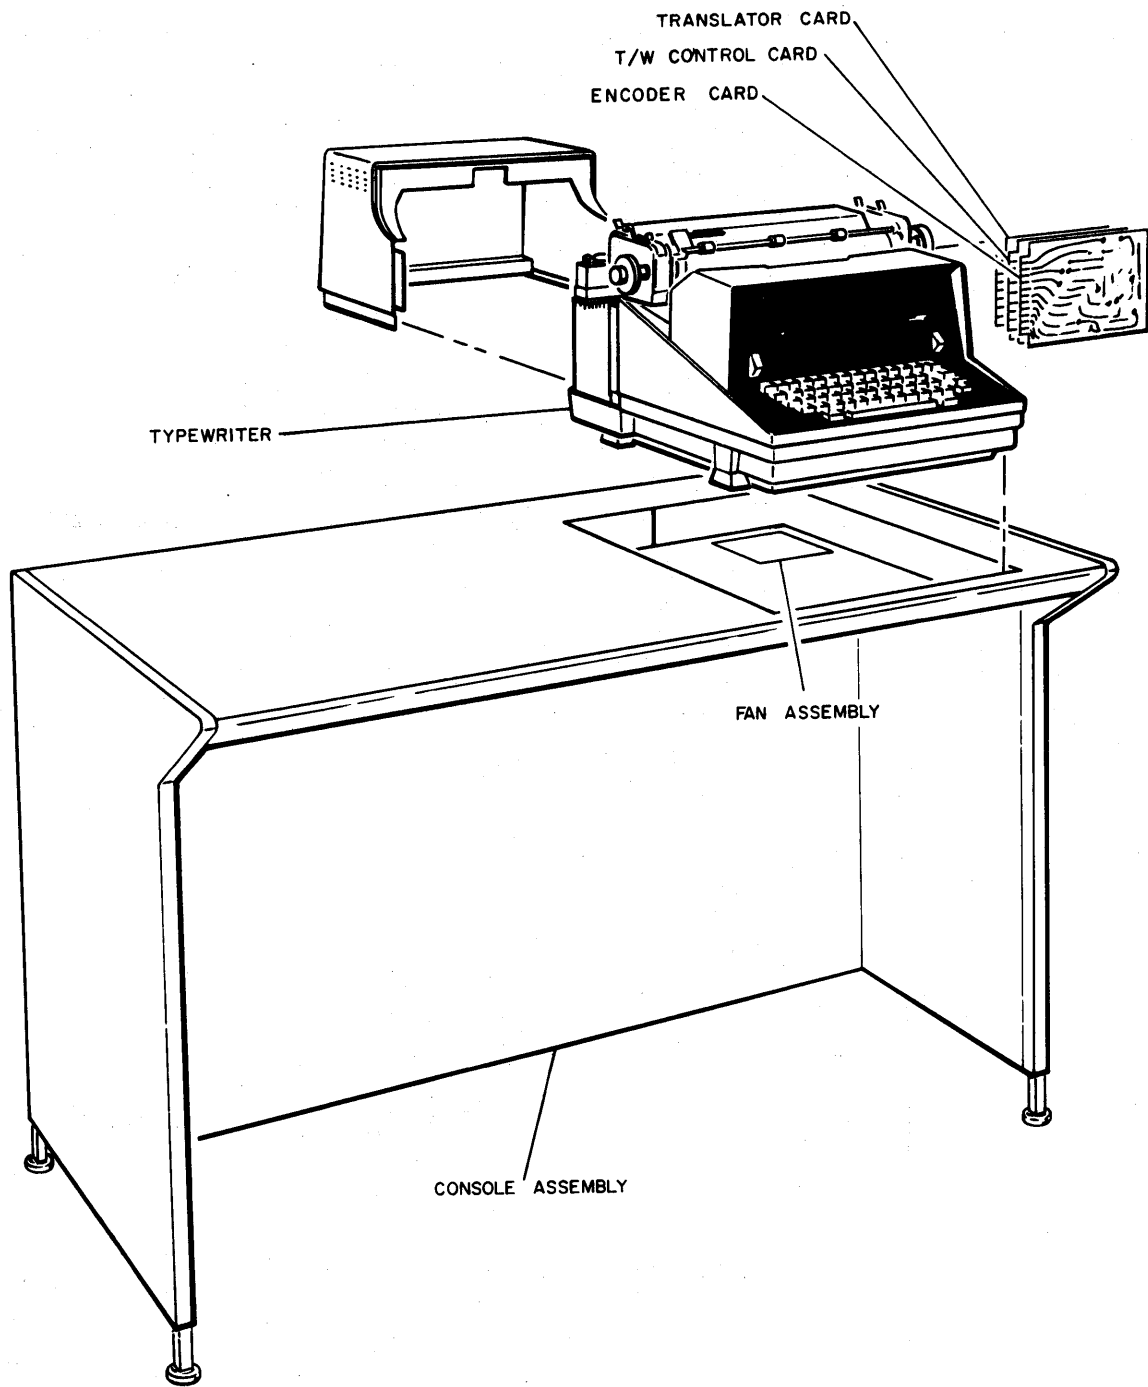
RPC 4480 TYPEWRITER ASSEMBLY
